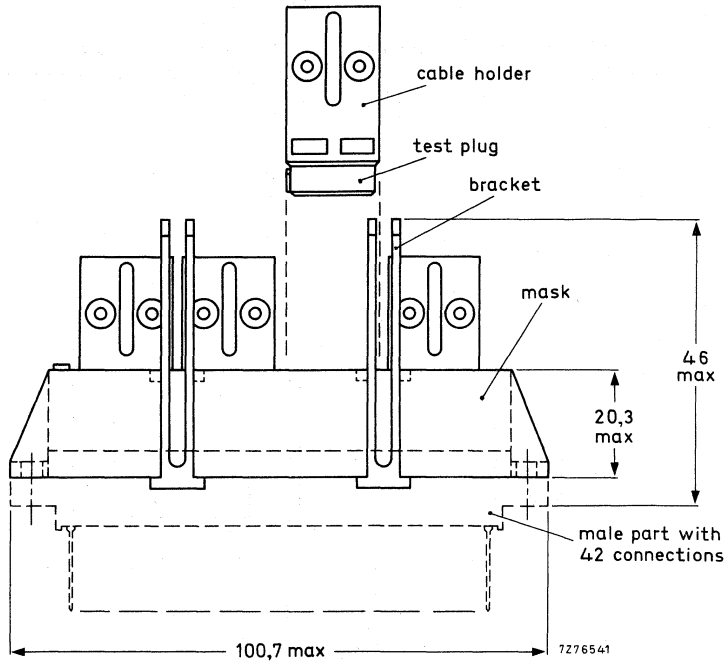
Four test plugs with auxiliary parts; dimensions in mm.
